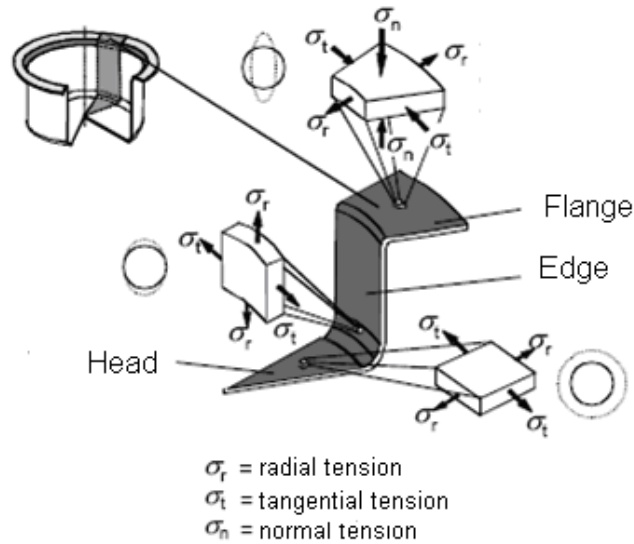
Deep drawing with a flat punch and a blank holder for rotational symmetric specimen [58]
